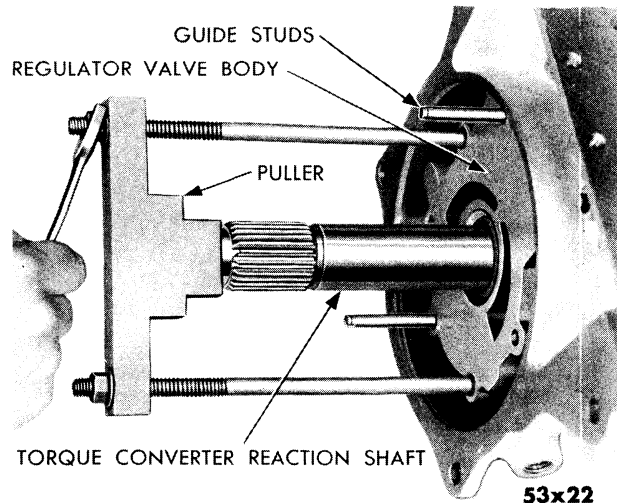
Removal of Regulator Valve Body (when Tool C-3287 is Available)
